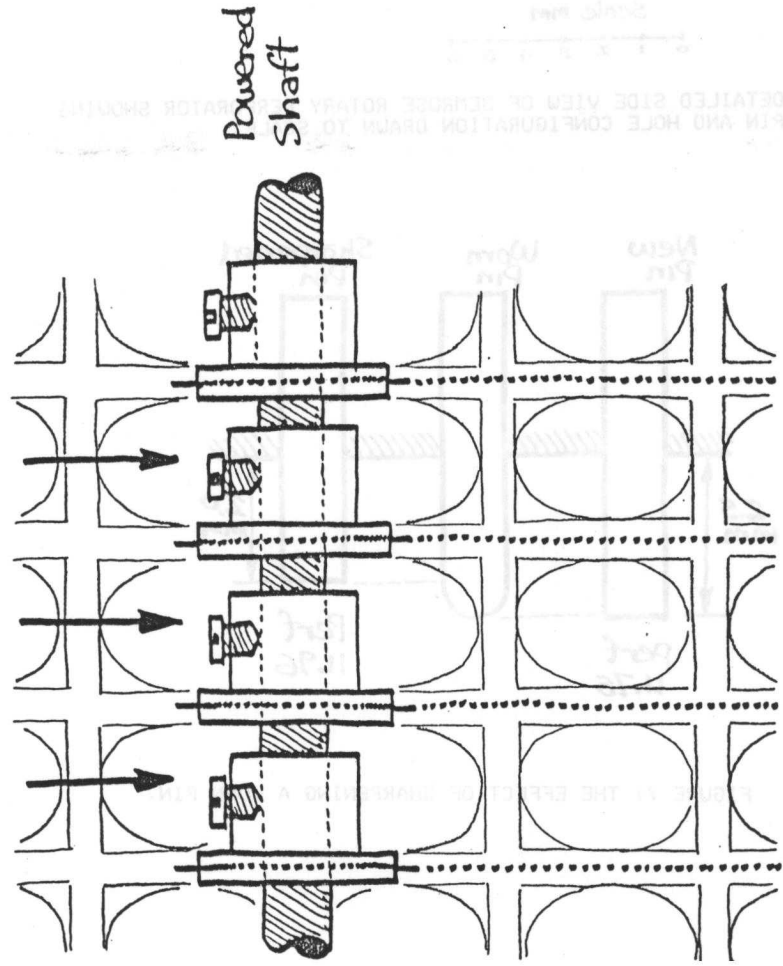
TOP VIEW OF BEMROSE ROTARY PERFORATOR.
